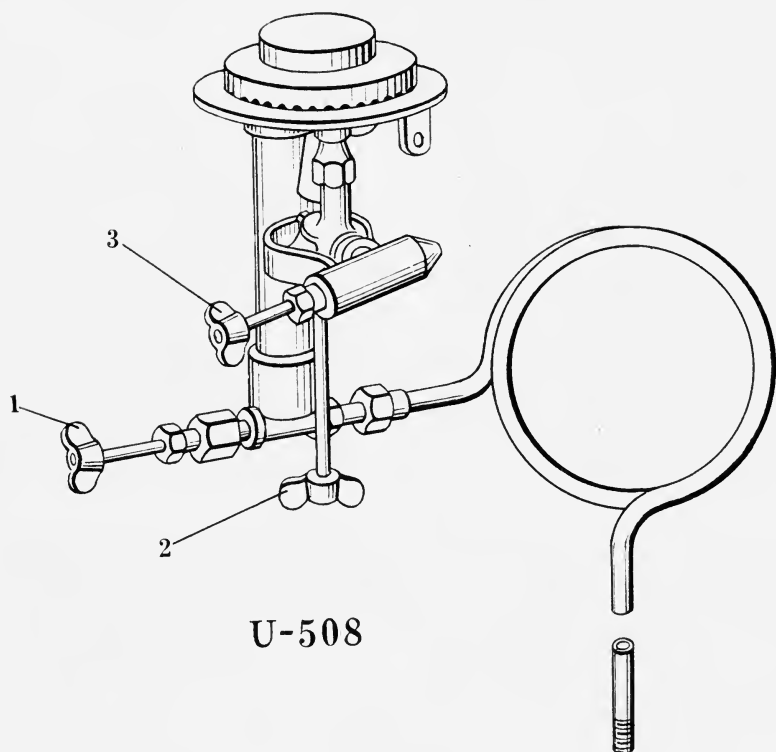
Gravity Feed Gasoline Mouthpiece Burner and Mixing Chamber Bulb. The screw W-836 (Fig. 96) holds the burner tube in position under the crucible mouthpiece.
